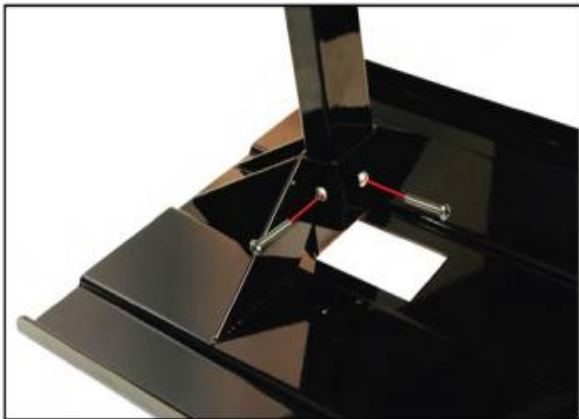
Securing the pedestal to the baseplate using the 2 socket cap screws
